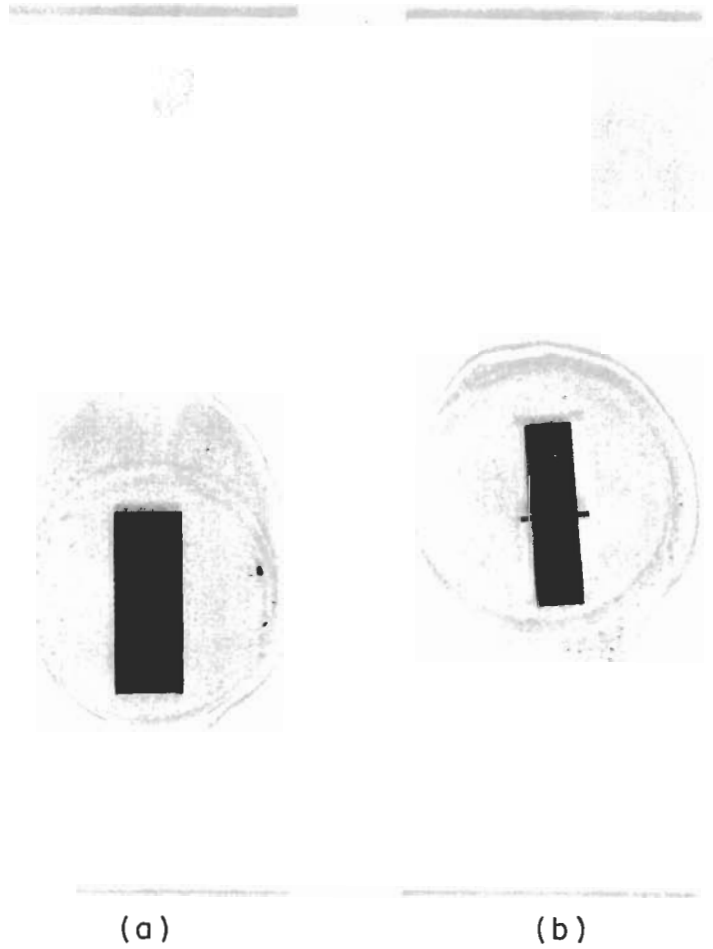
PHOTOGRAPH OF MOUNTED HALL ELEMENT WAFER BEFORE AND AFTER ULTRASONIC CUTTING OPERATION
